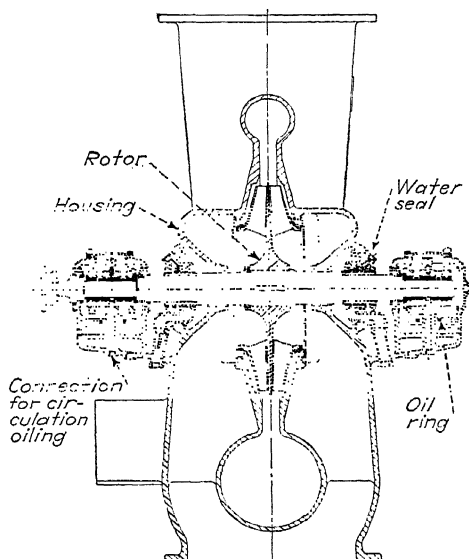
Single-stage, double-flow centrifugal compressor equipped with ring-oiled bearings and water seals.
